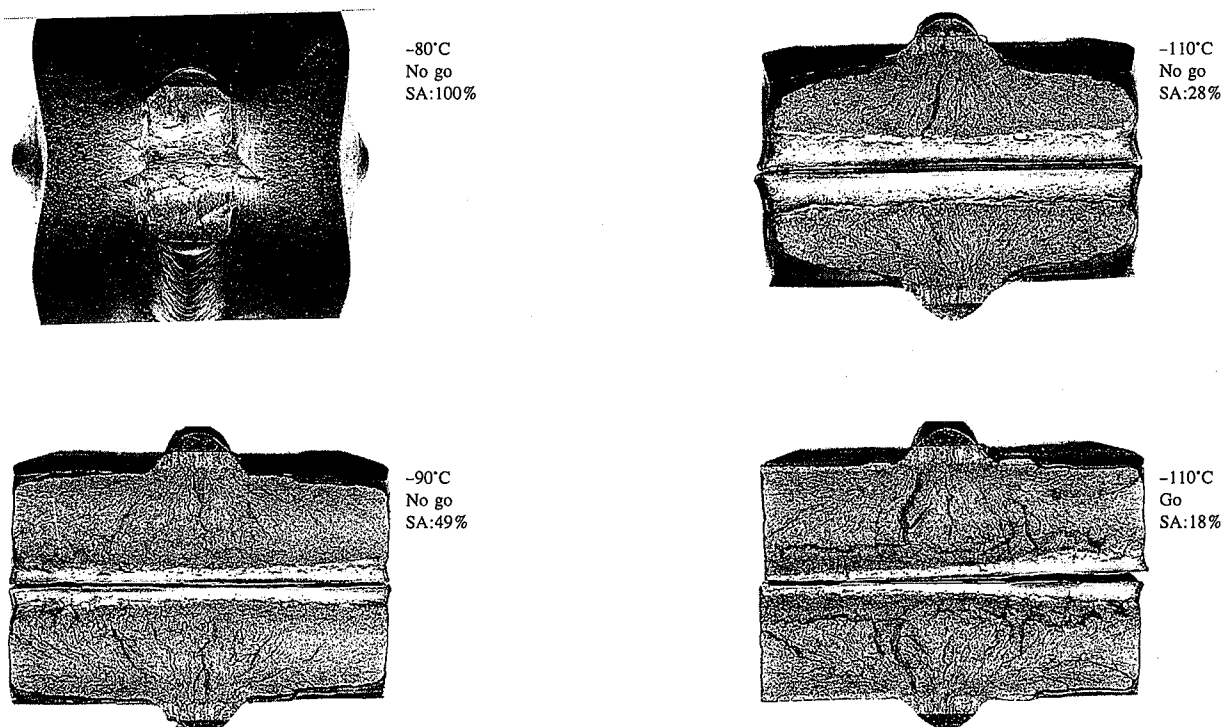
Typical fracture surfaces of NRL drop-weight test specimens
